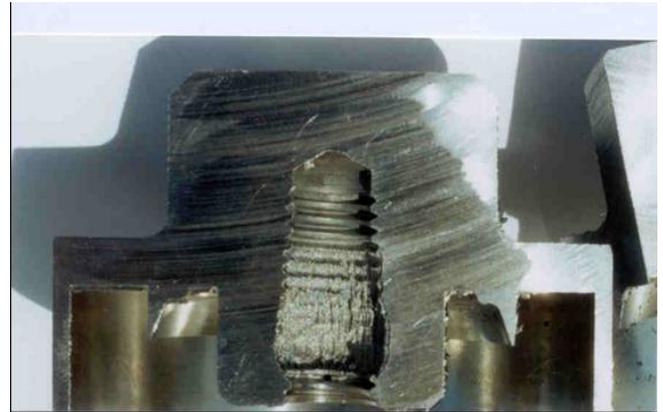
Corrosion product deposits on the threading (female) due to crevice corrosion.
